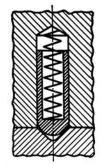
Instead of a ball, a hollow plunger is used which accommodates the spring. The end is hemispherical.
